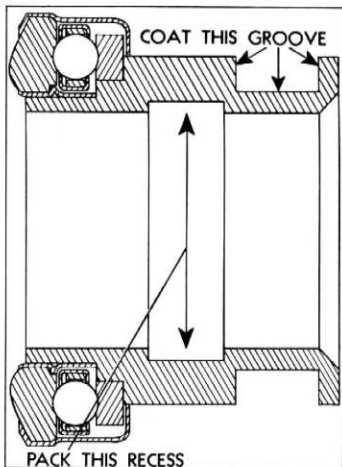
Lubrication Points on Clutch Throwout Bearing
